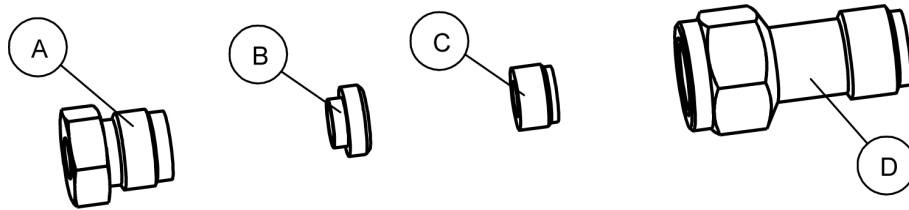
Exploded view of a Huber & Suhner 21\_SK-50-2-58 jack.
